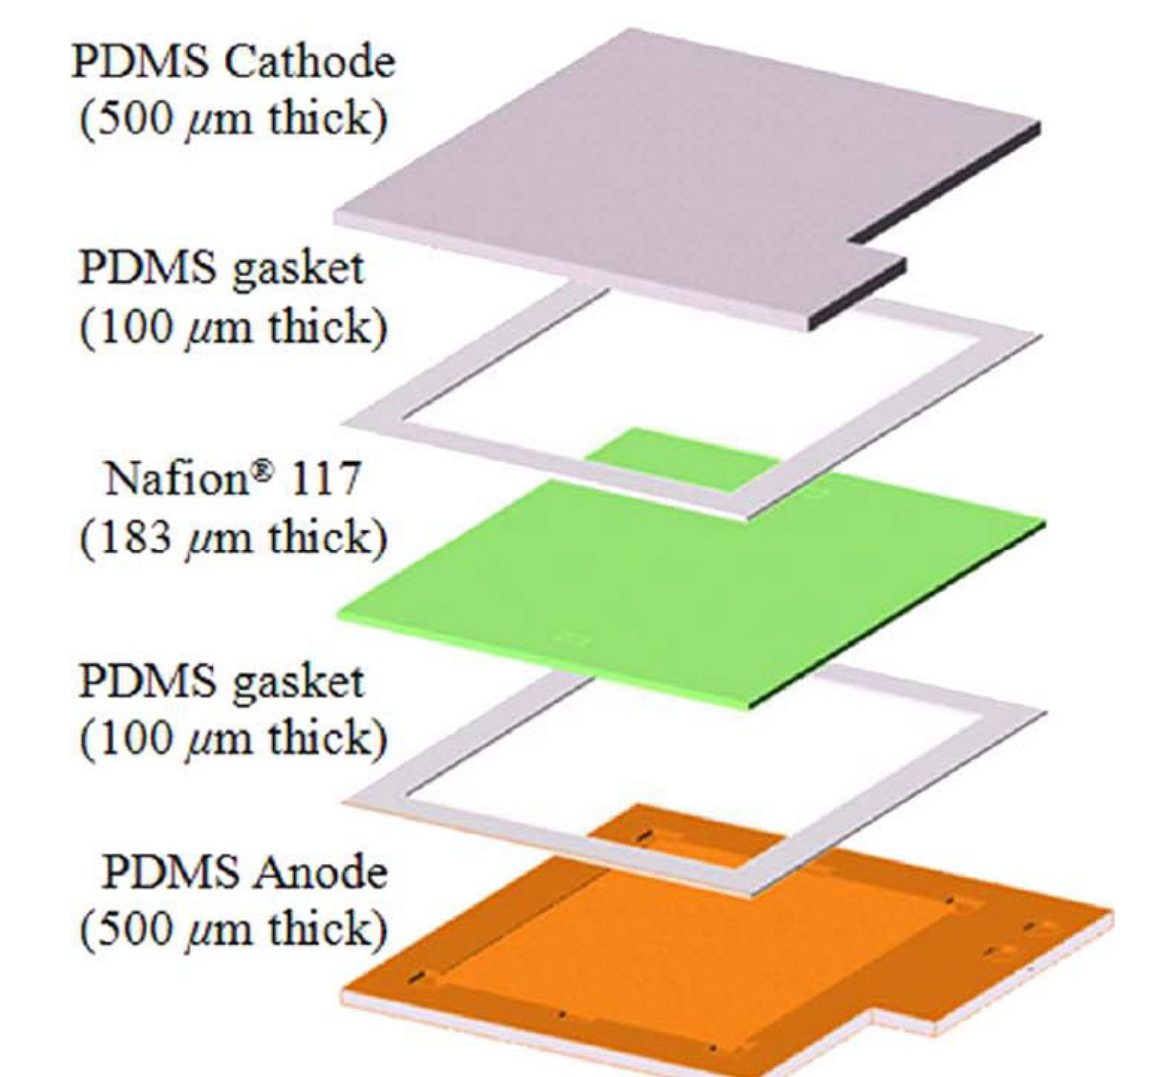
Exploded view of μ MFC assembly. (Siu et. al. 2008).
